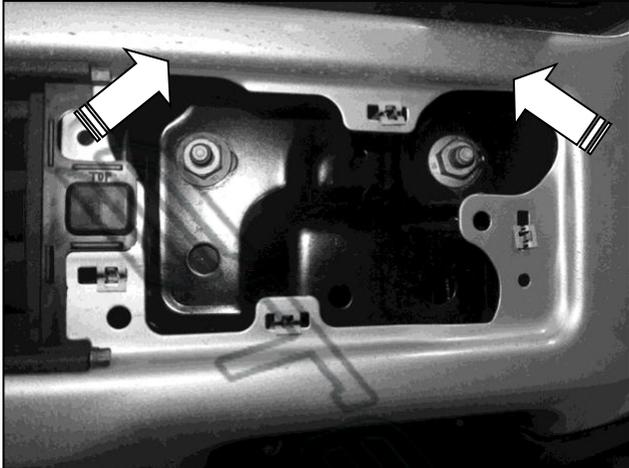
Remove plastic bumper pad from bumper (Driver/left side Pictured)
